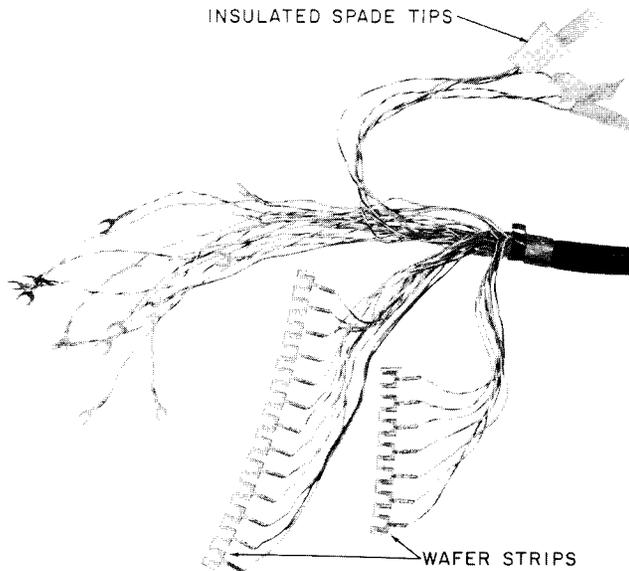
Slotted Wafer Strip End of Mounting Cord, Later Type
